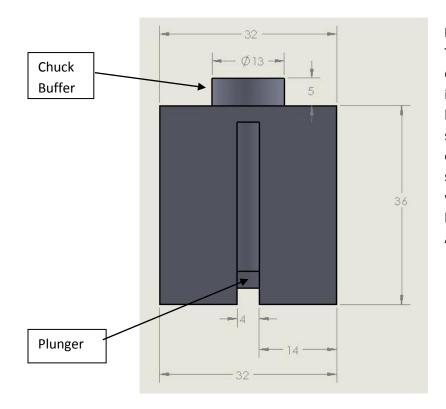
The frontal view of the slider. The plunger isn't shown fully but has a diameter of 19.3 mm's. All values shown in this figure is in millimeters. A chuck buffer is located at the top that and is simply a placeholder for the bearing. It is damaged by the chuck instead the actual slider. The narrow slit in the middle is where the slider accommodates for the handle of the integrated flesh protector. All measurements are in millimeters.
